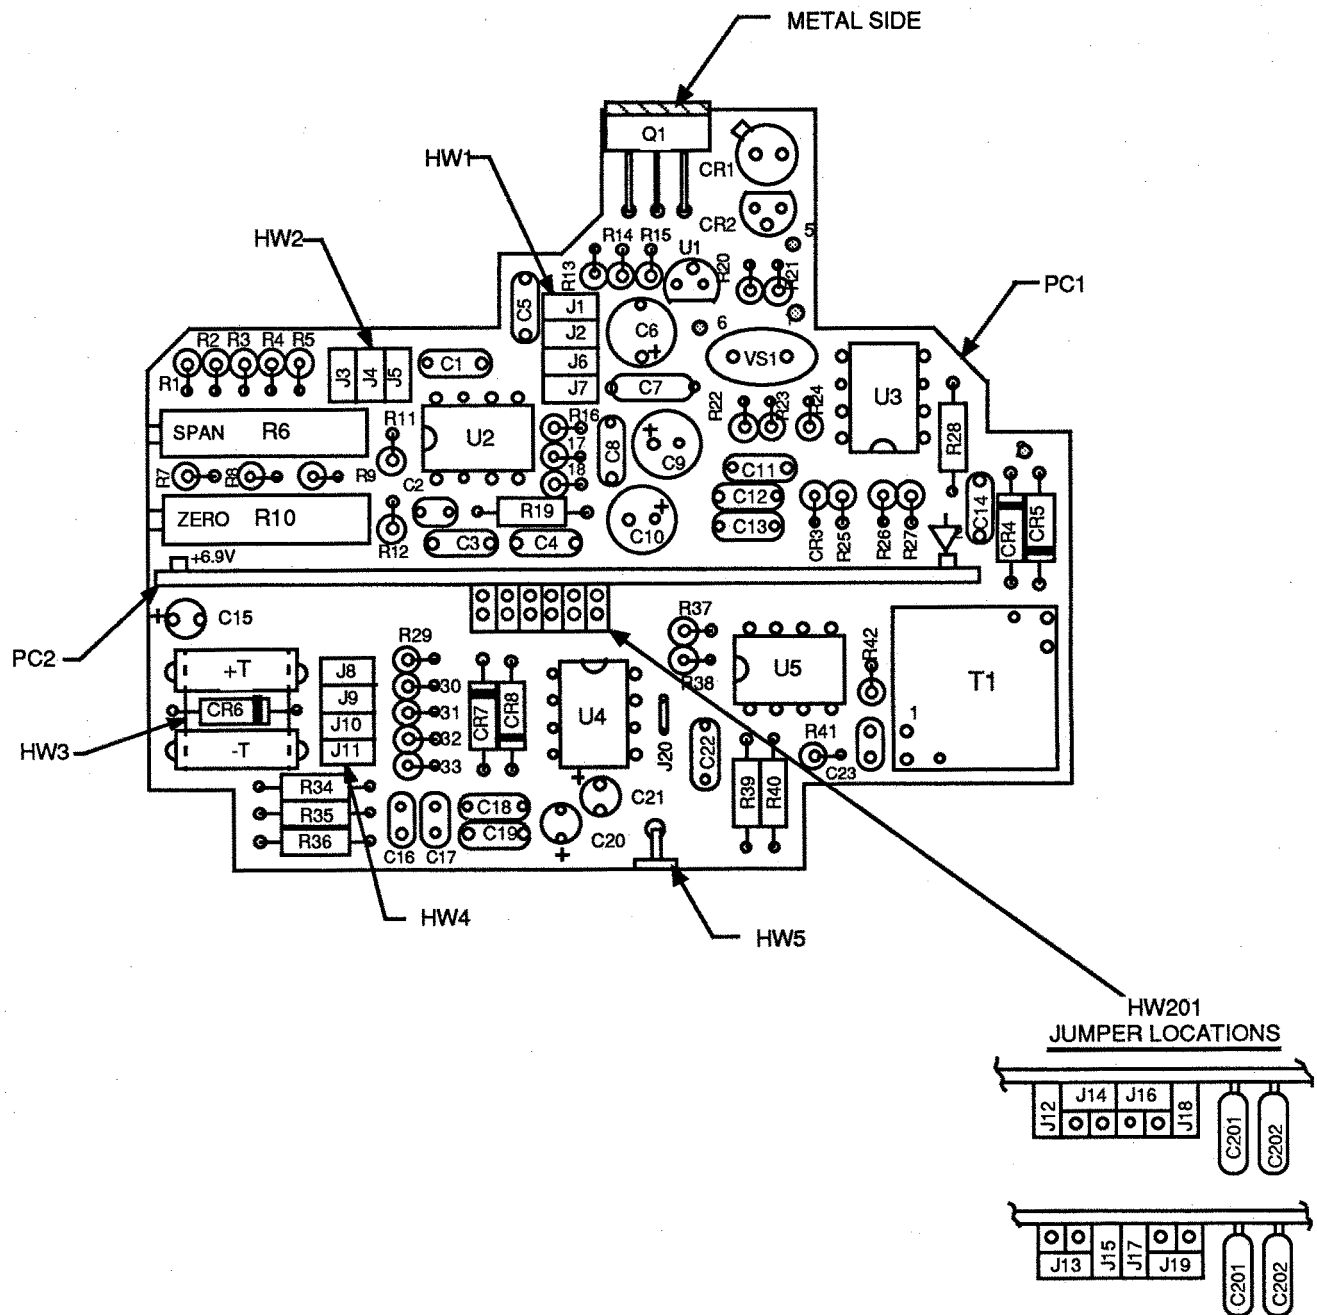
Printed Circuit Board Assembly 1 for the EP-FDX Transmitter with DIN Housing
